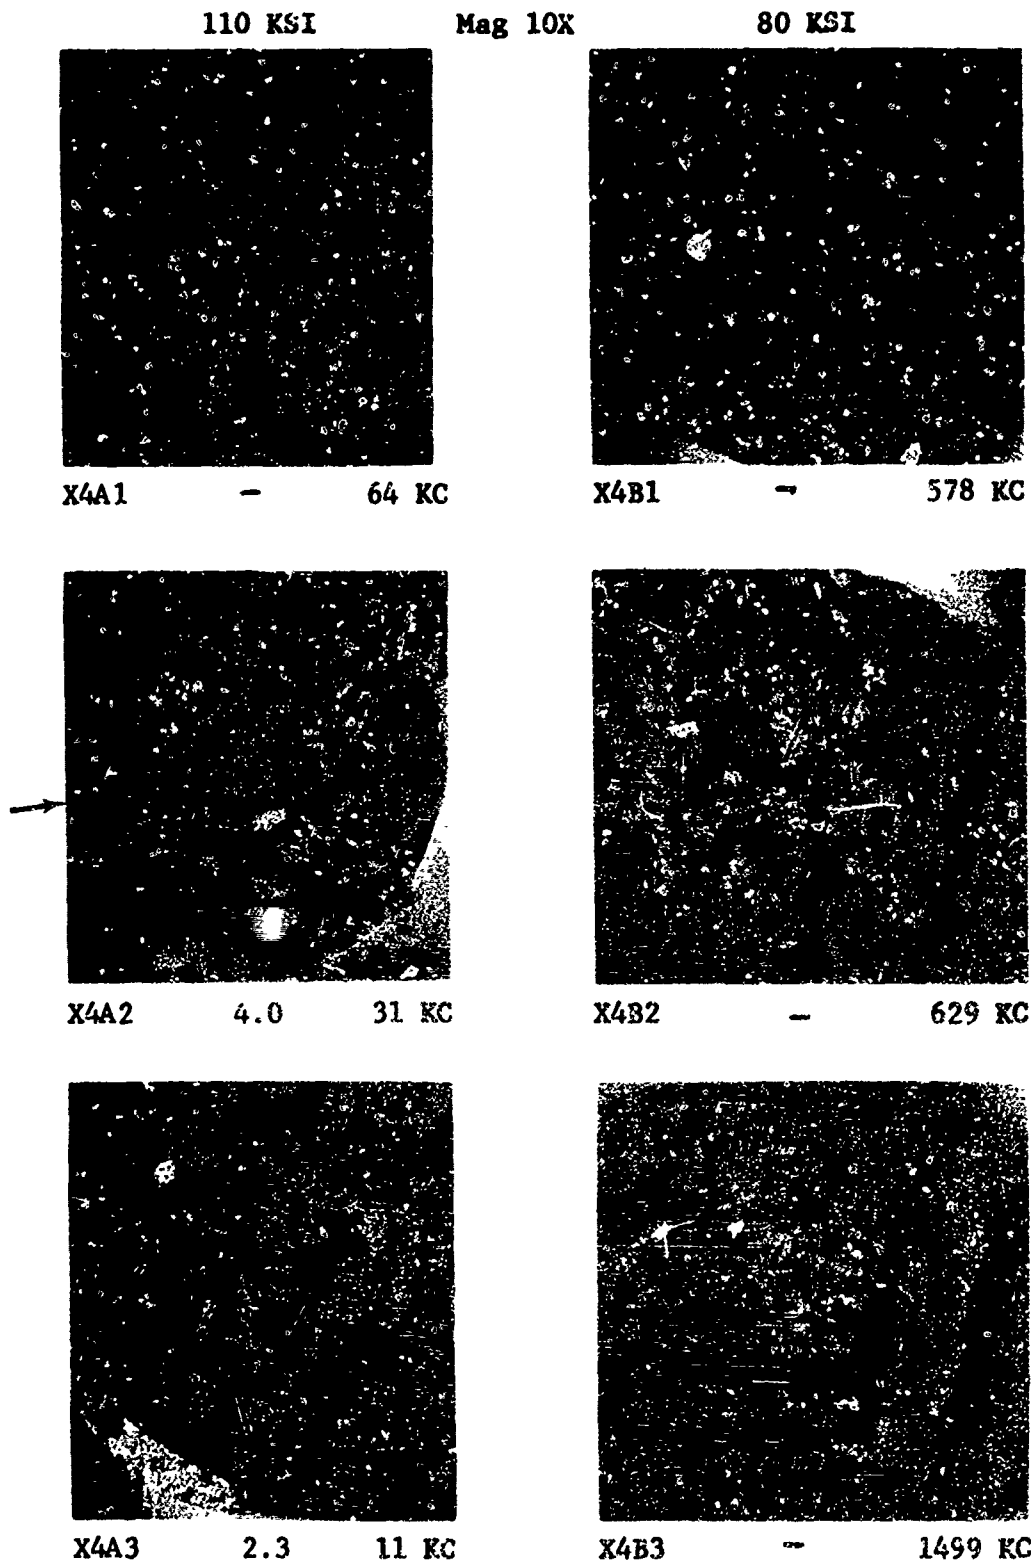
Fracture Surfaces of Failed Fatigue Specimens Series X4-
